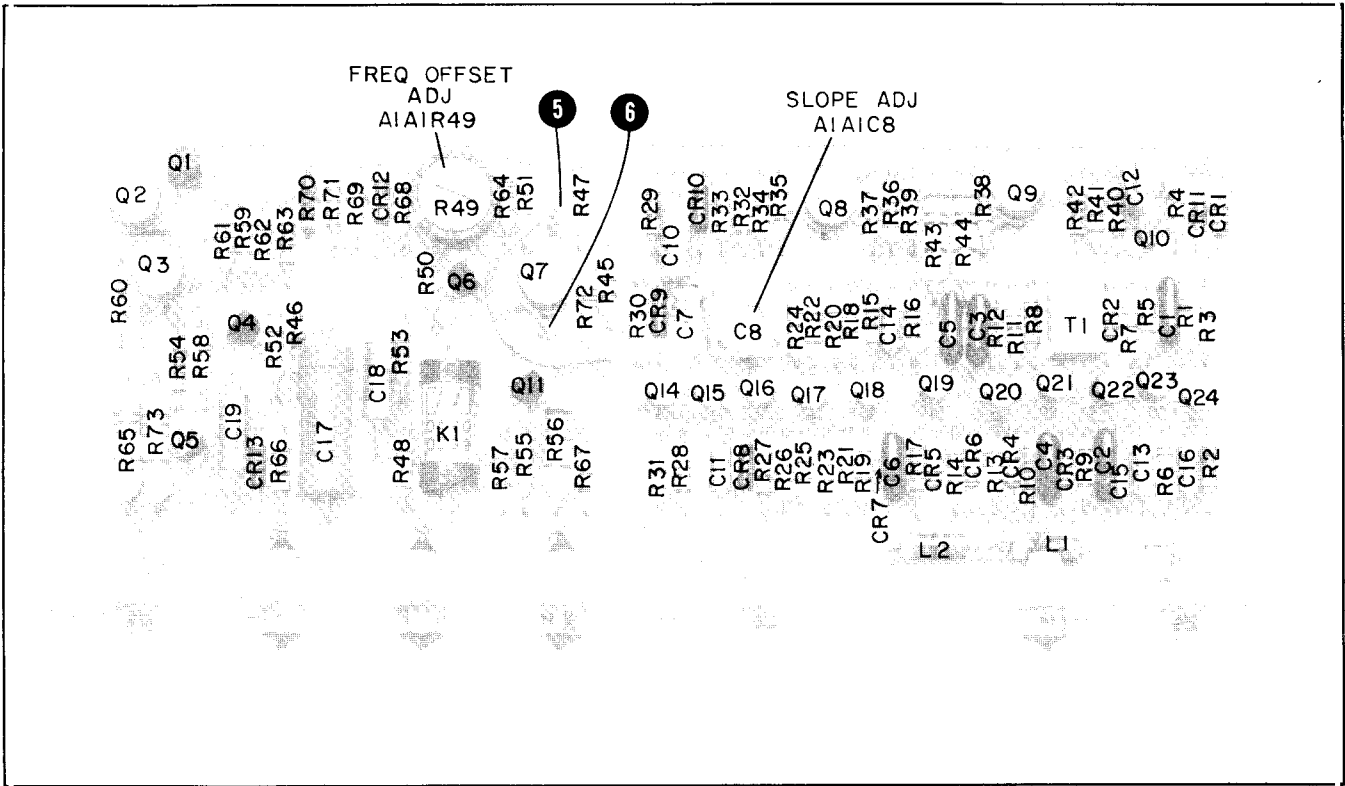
Component Identification, A1A1 Discriminator Assembly
